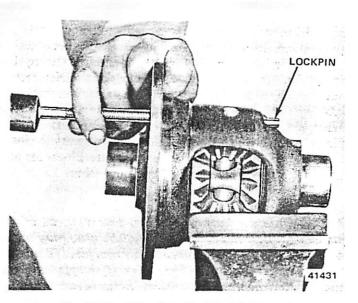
F-33 Pinion Mate Shaft Lockpin Removal
